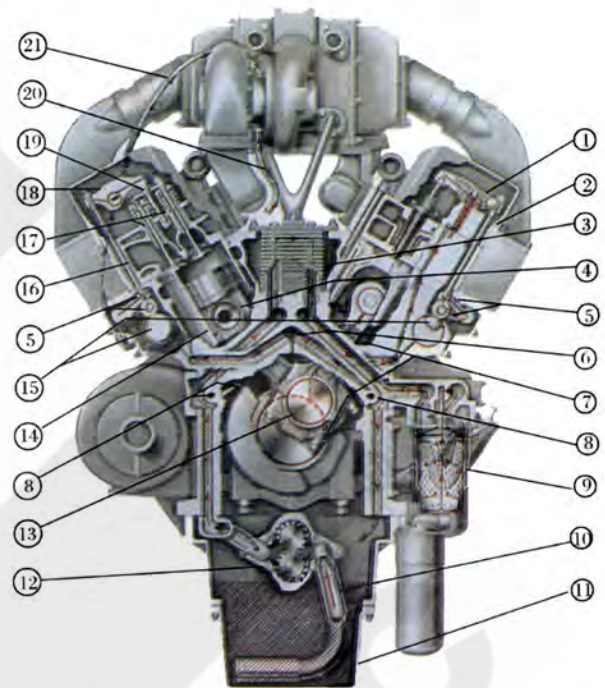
lubricating oil flow (front view) KTA-38 Engine
